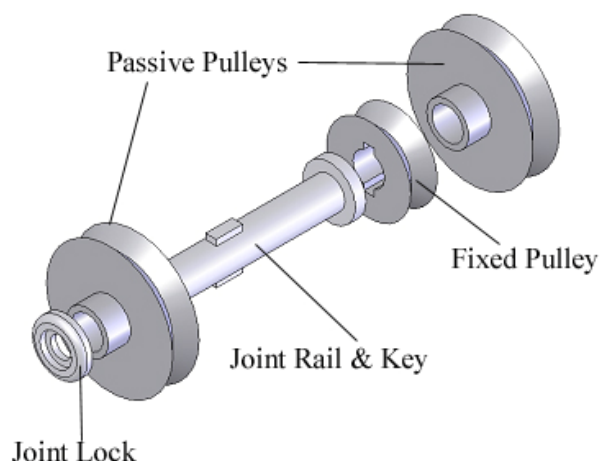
Metacarpophalangeal (MP) Joint Exploded View
